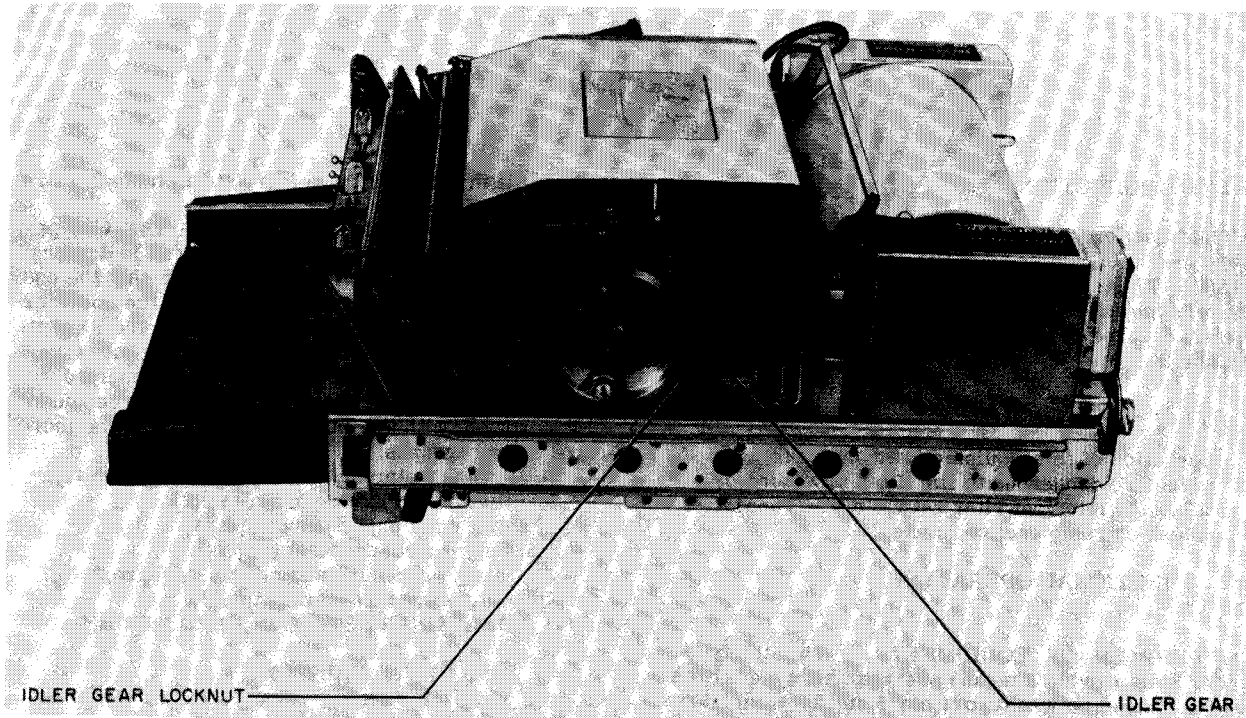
Printer and Electrical Chassis, Right-Side View
